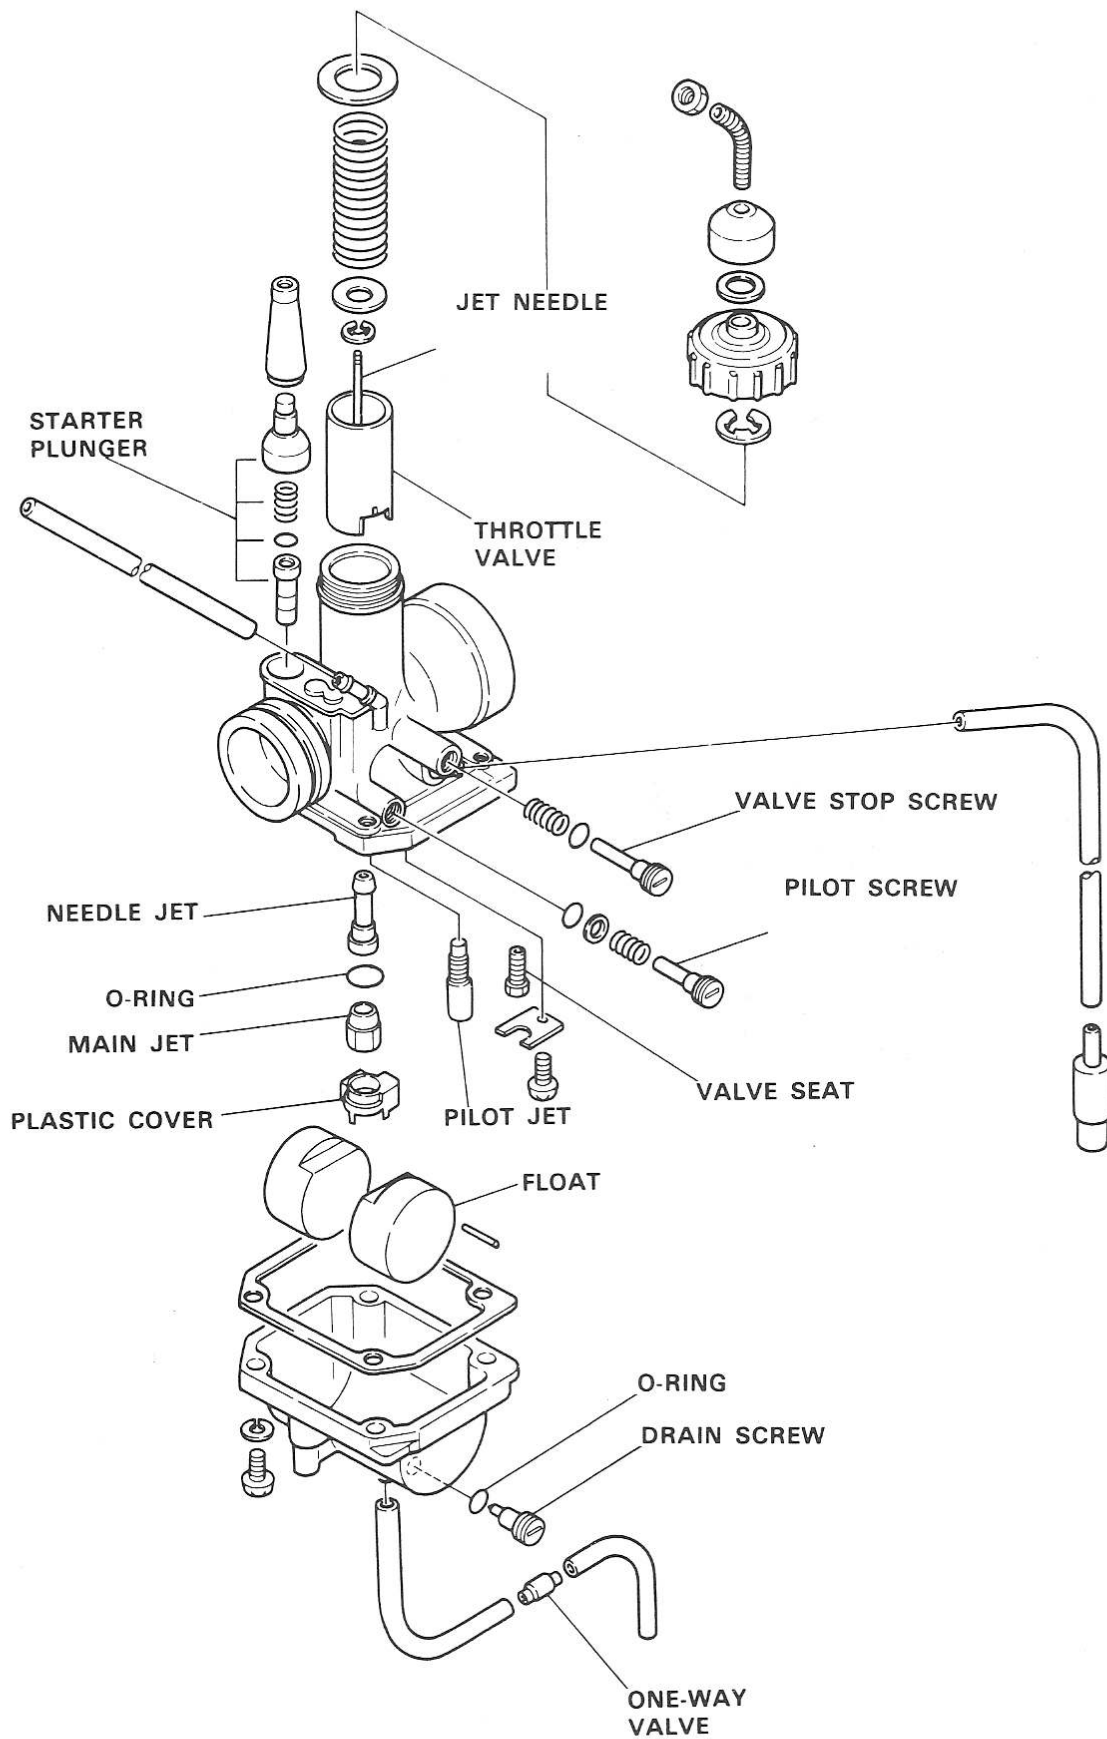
YTM 200K carburetor components — exploded view (Sec 5)
